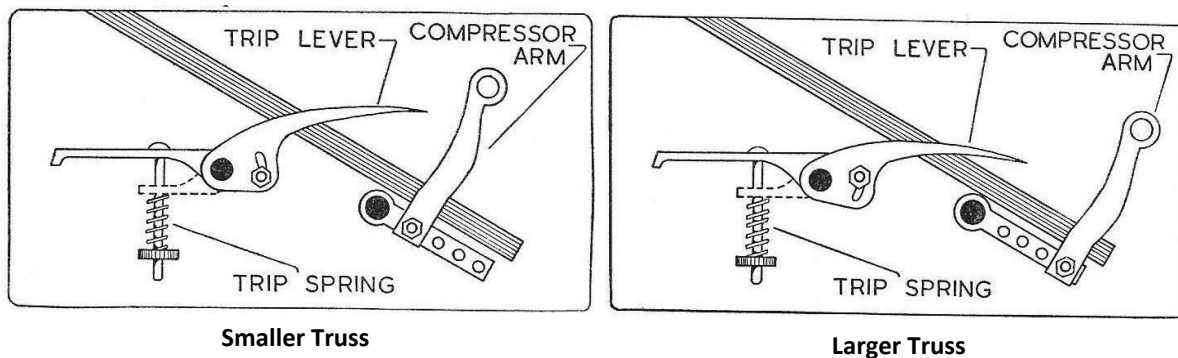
Trusser settings to adjust truss size – Smaller truss (*left*) and larger truss (*right*)
